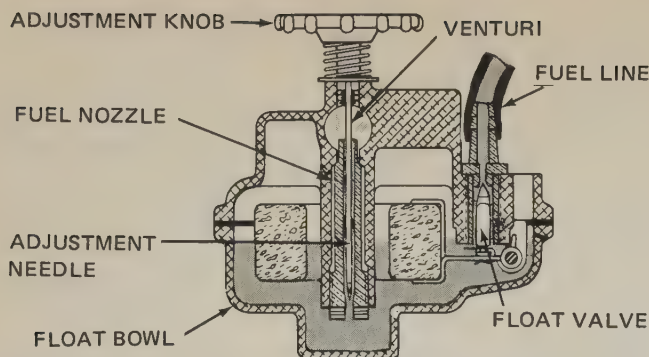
Sectional view of a carburetor for a two-cycle engine used on a lawn mower. (Lawn Boy Division of Outboard Marine Corporation)
